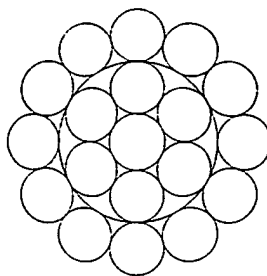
Cross section of a Seale-type strand (9+9+1) wires
